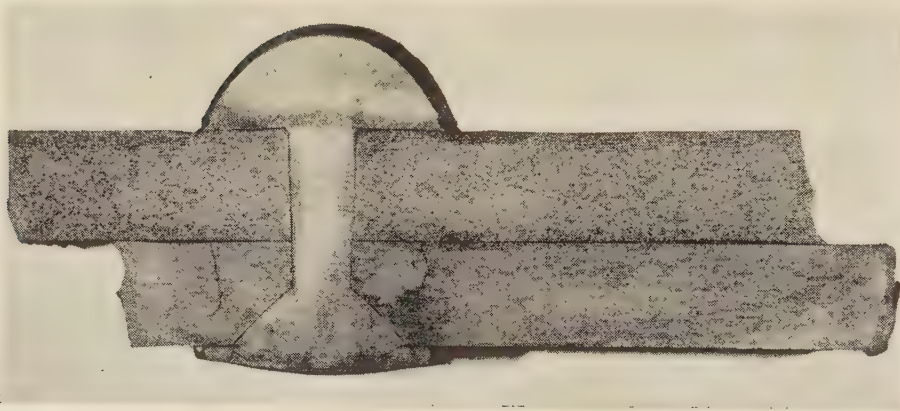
CRACKED PLATE FROM A LOCOMOTIVE-BOILER SEAM
